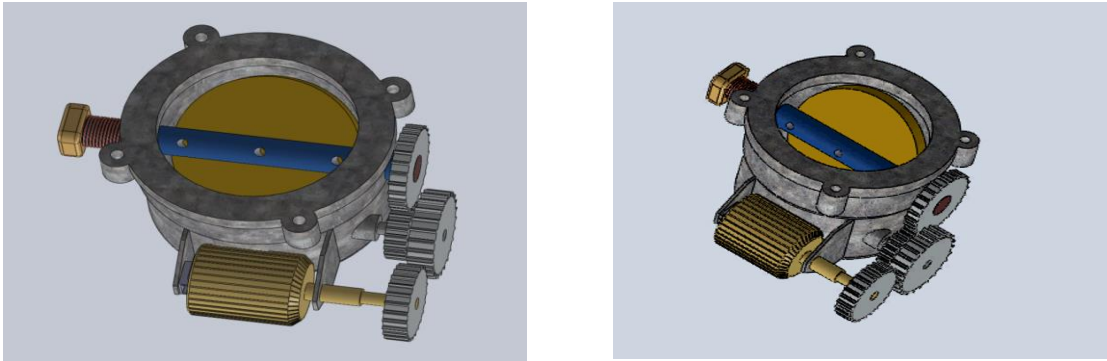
3D part of fully closed throttle valve 3D part of fully open throttle valve
